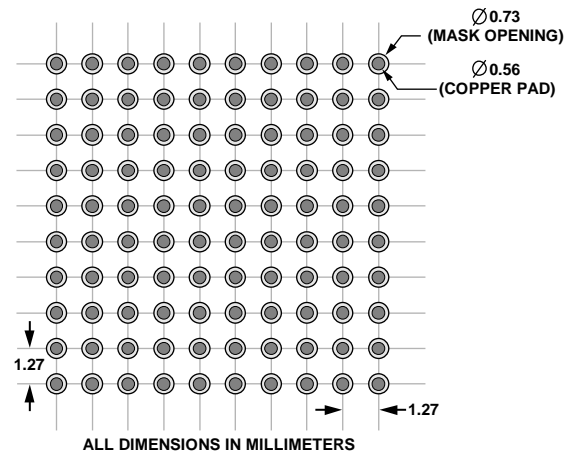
Recommend PCB Pattern, Solder Mask Defined Pads
